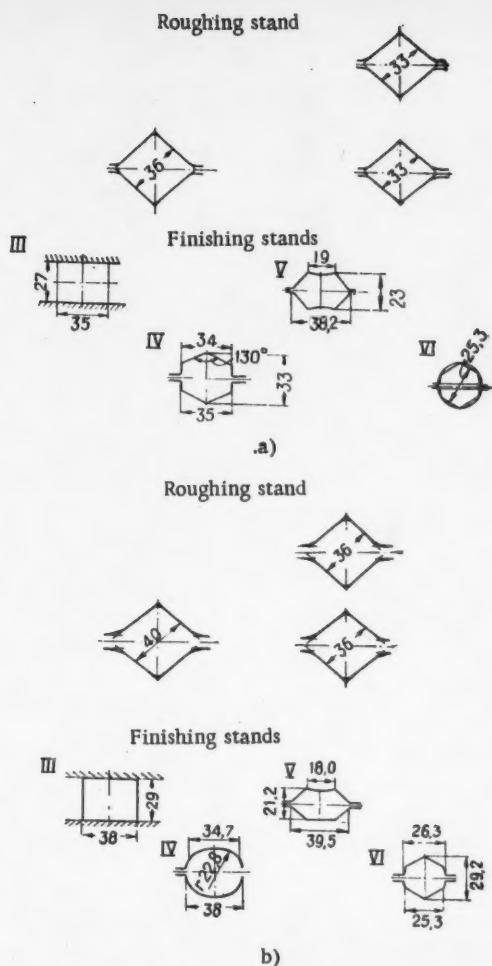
Setting of rolls for rolling hollow drill-steel:
